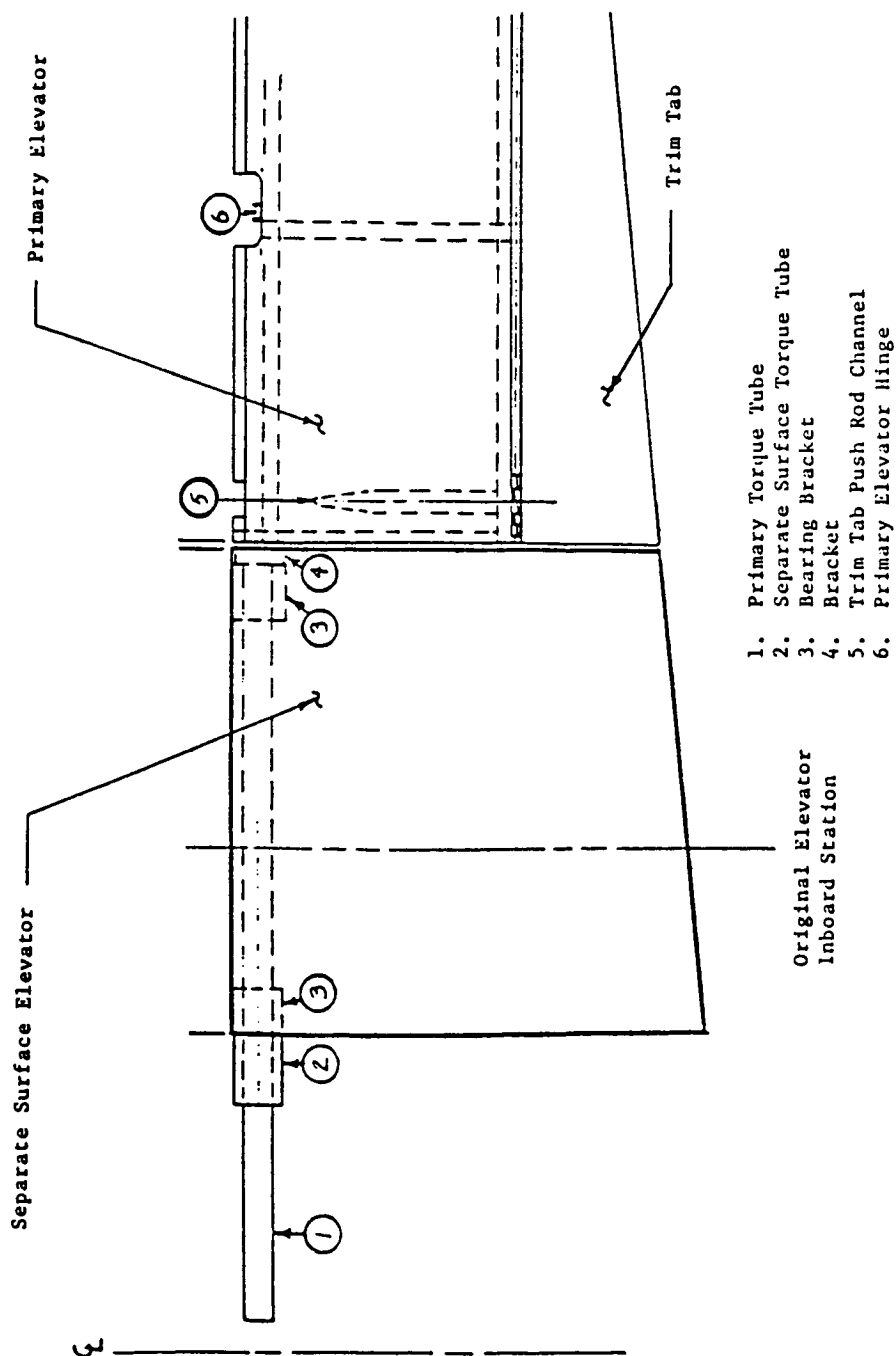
Separate Surface Elevator: Concentric Torque Tube Arrangement
